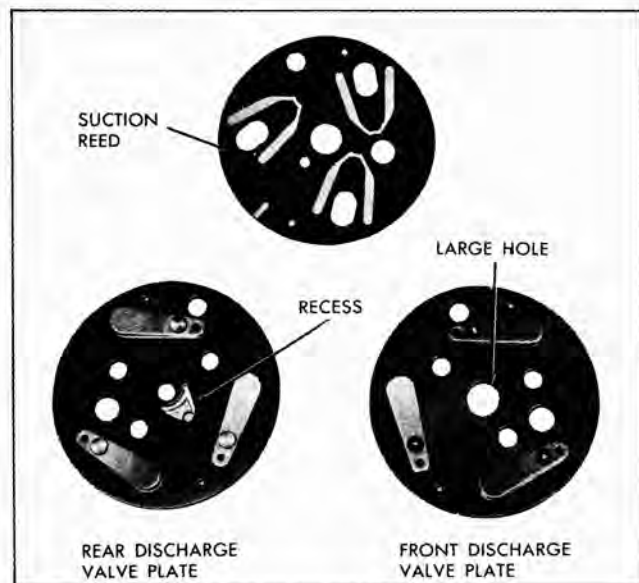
Identification of Front and Rear Discharge Valve Plate
